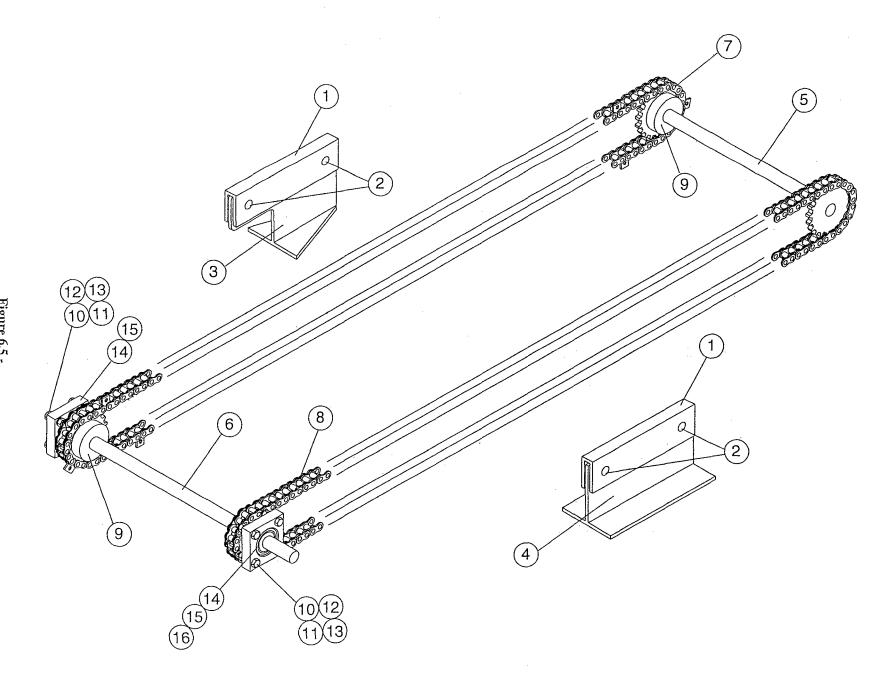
Conveyor shafts, chains, bearings, and guides
